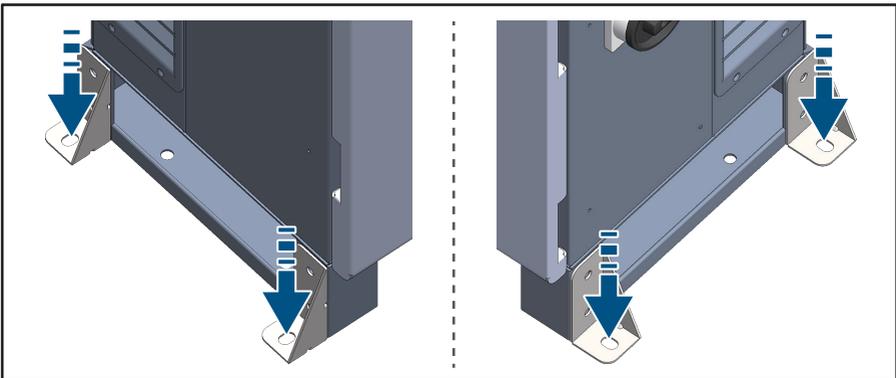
To secure inverter grounded brackets to ground-mounting base
